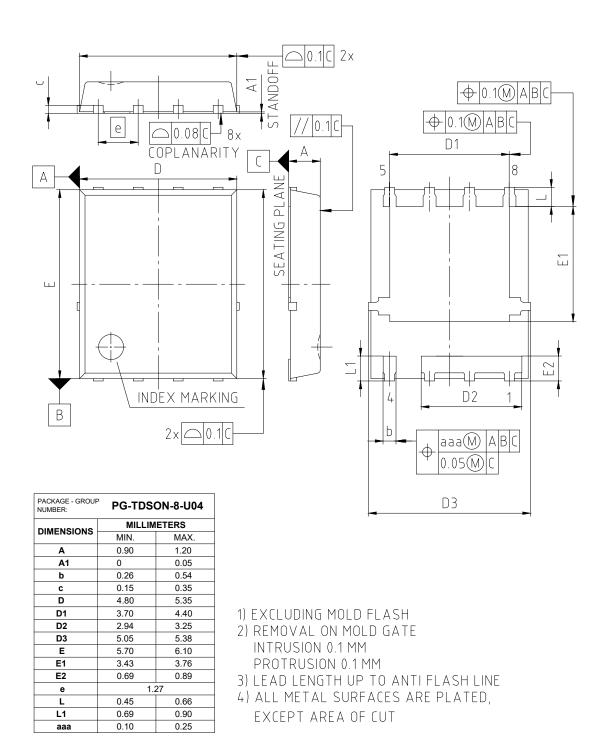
Outline PG-TDSON-8 FL, dimensions in mm
